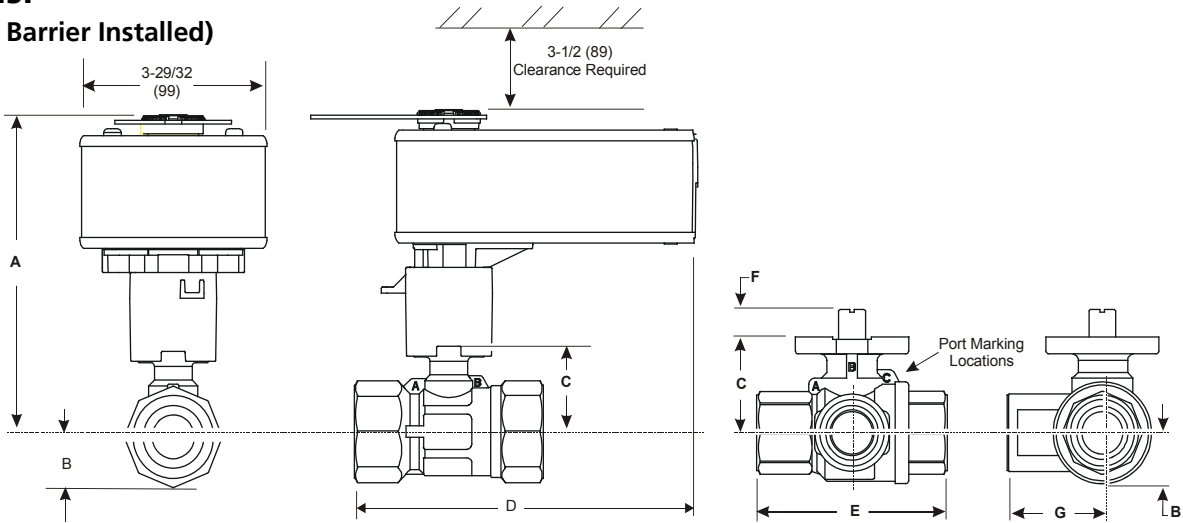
Spring Return VA(M)S-70 Series Ball Valves (With Optional Thermal Barrier) - Dimensions, in. (mm)
